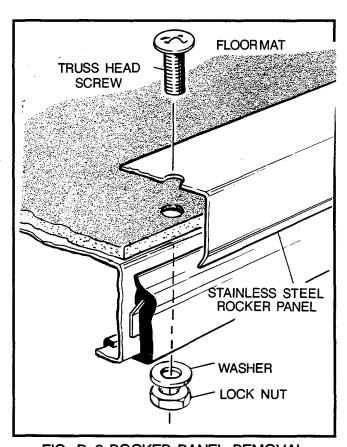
ROCKER PANEL REMOVAL STAINLESS STEEL
